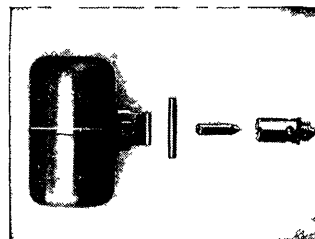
Assemble all parts that control the gasoline level. Check float for dents and wear on lip, and float pin for wear. Check bowl cover for warpage and wear in countershaft hole. If needle shows groove on seating surface replace both needle and seat
